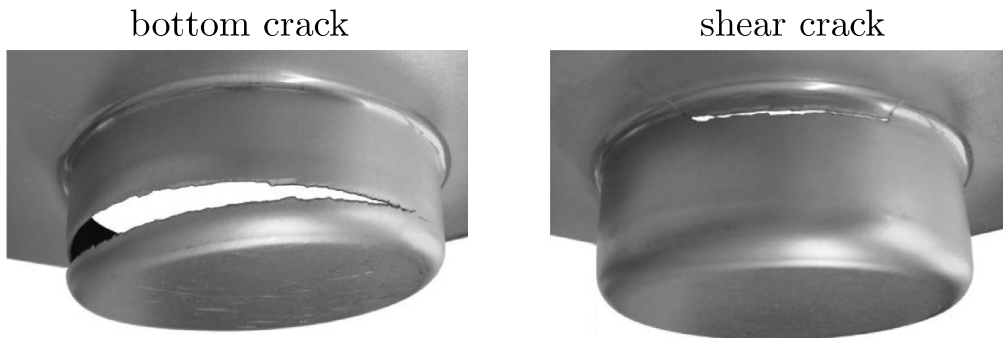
Location of cracks observed experimentally in deep drawing experiments (after [43]). In the case of a blank-holder force of 200 kN, a shear crack appears for a blank size L between 133 mm and 150 mm while a bottom crack occurs for a blank size L above 150 mm.
